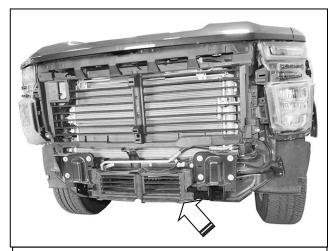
Remove outer bumper supports attached to bottom of frame (driver/left pictured)
